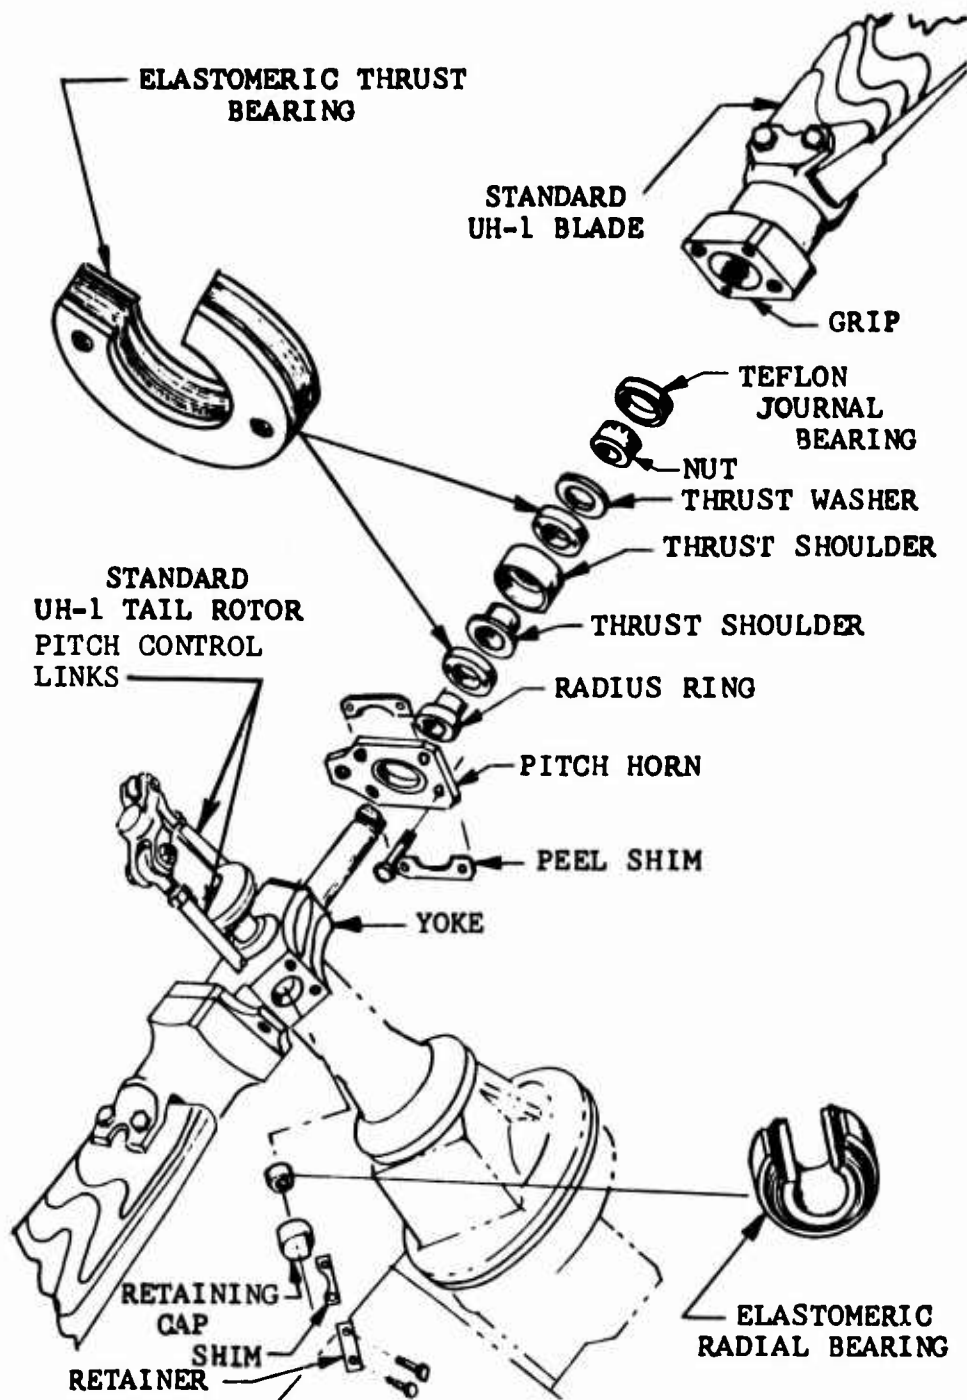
ELASTOMERIC BEARING TAIL ROTOR CONFIGURATION 1.
